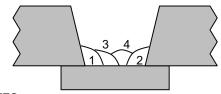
Geometry of the Weld Joint to be Used for the Screening Test Coupon
